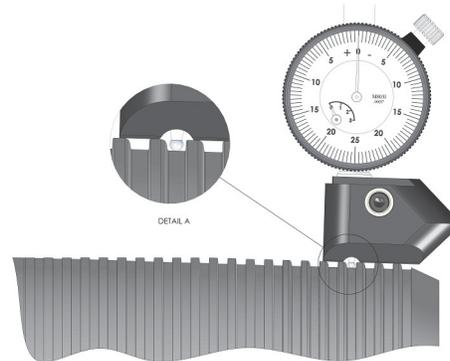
External Thread Height Gauge on Pin Threads (Buttress Thread Height Gauge)
